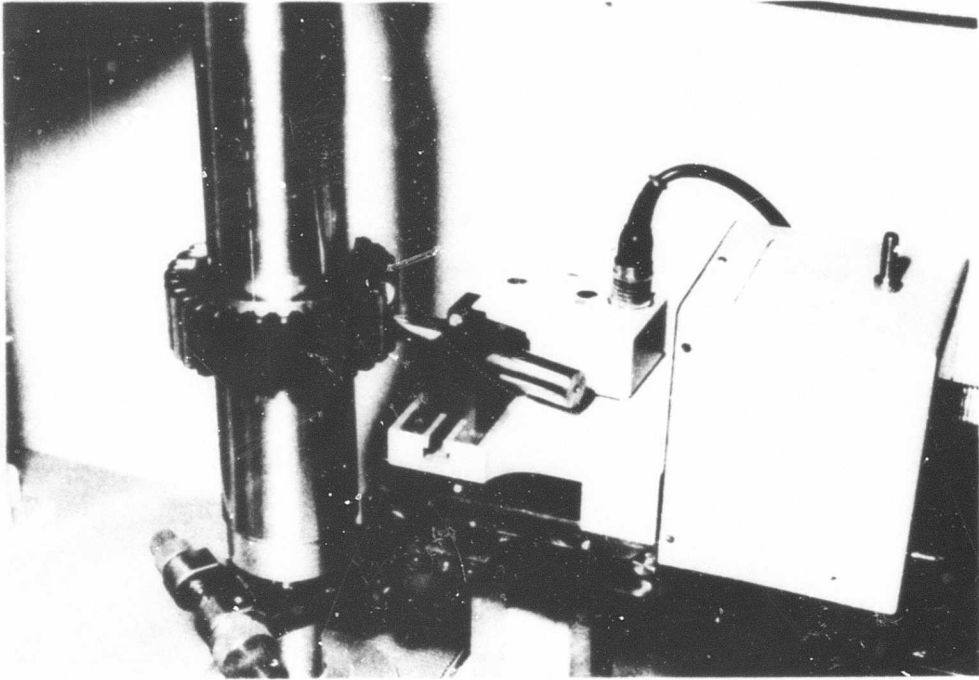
Measurement of Runout on the Planet Gear Performed by the Hofler Gear Measuring Machine.
